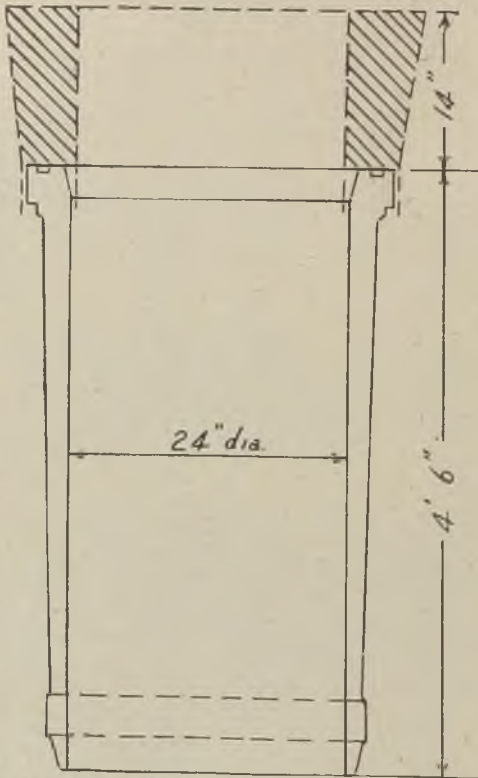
DIESEL ENGINE CYLINDER LINER. WEIGHT OF CASTING 1 TON 16 CWT. ; WEIGHT OF LINER CASTING PLUS HEAD 2 TONS 5 CWT. EXTRA COST DUE TO HEAD 25 PER CENT.
